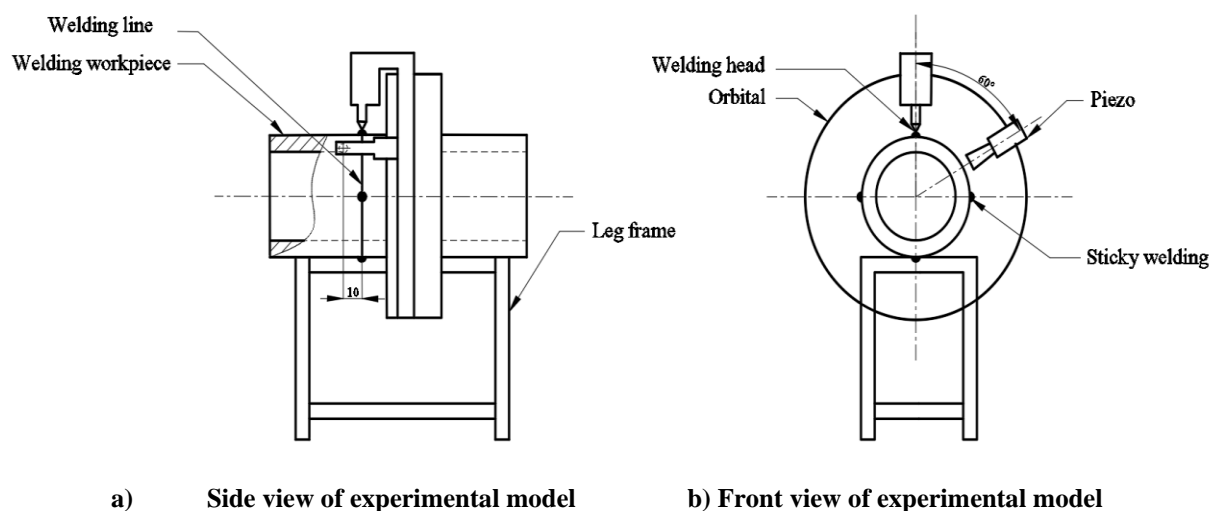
The position of PZT in the Orbital TIG welding.
